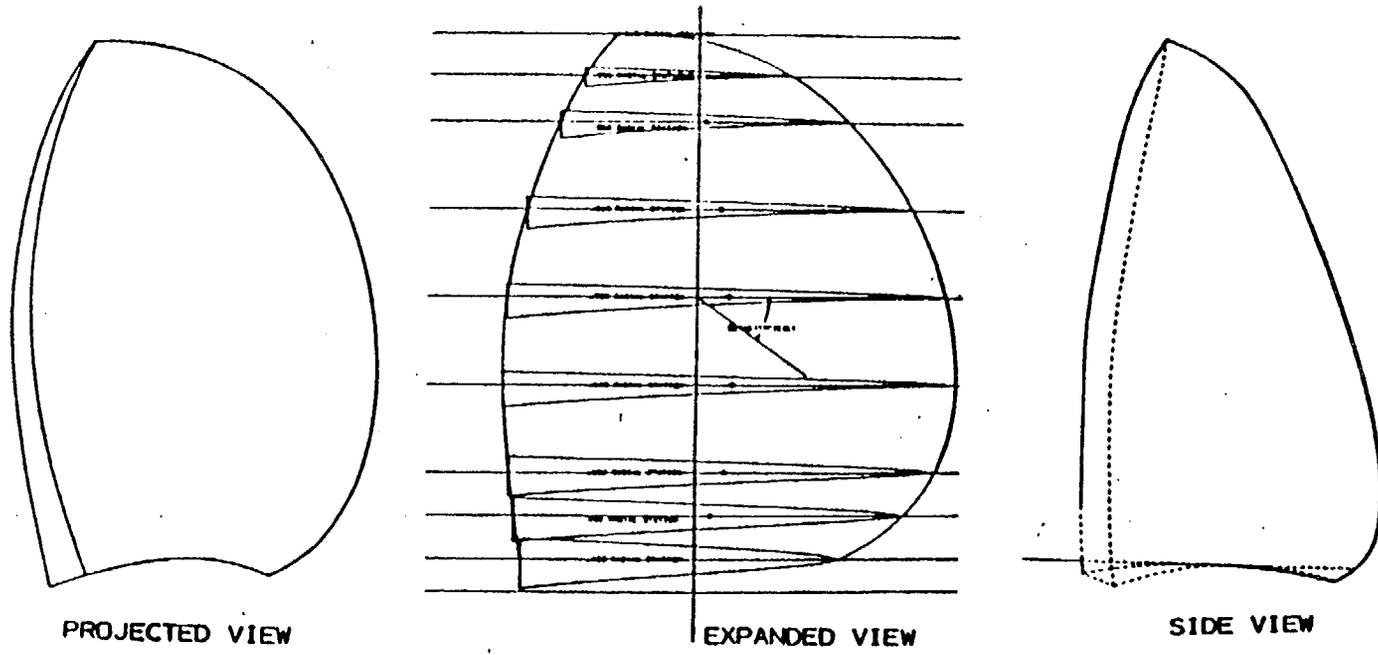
PROPELLER BLADE SECTIONS EXPANDED VIEW
